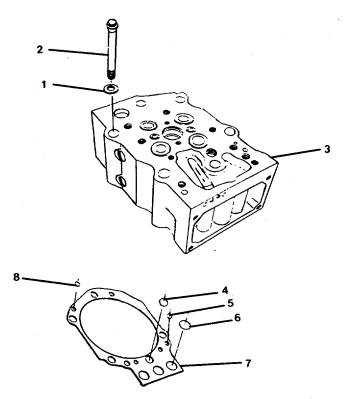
Cylinder Head Group, Cylinder Head Diesel Engine.
